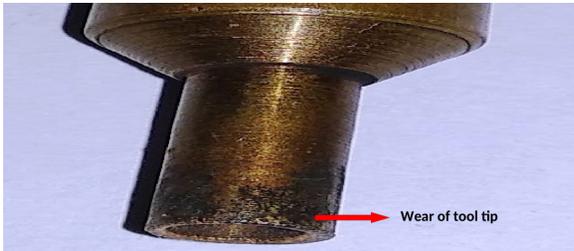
Wear of tool electrodes tip after PMND-EDM process
